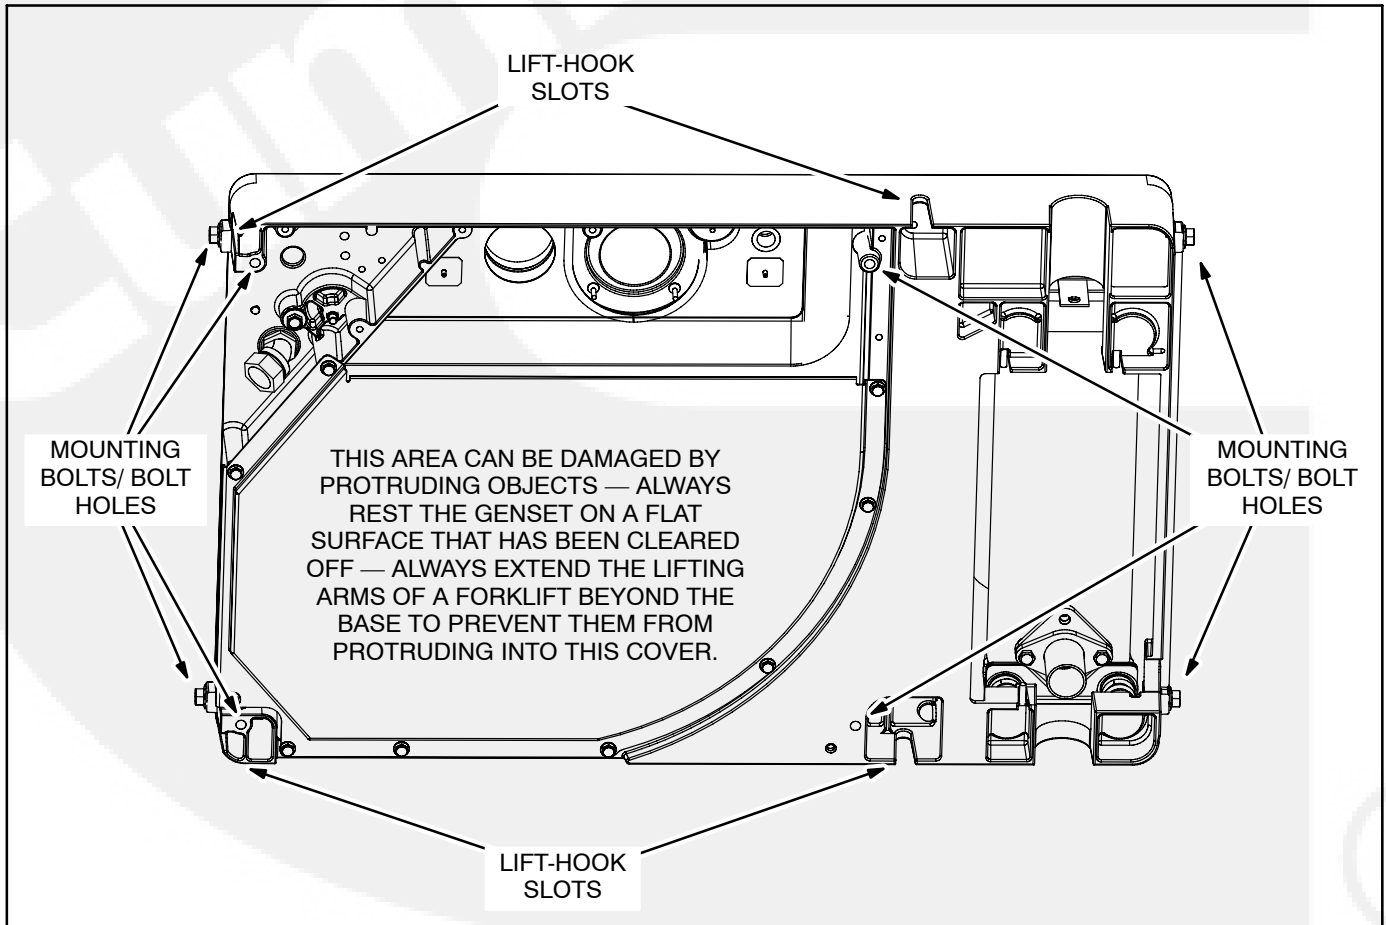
GENSET LIFT-HOOK SLOTS—MOUNTING BOLT HOLES—AREA THAT CAN BE DAMAGED
